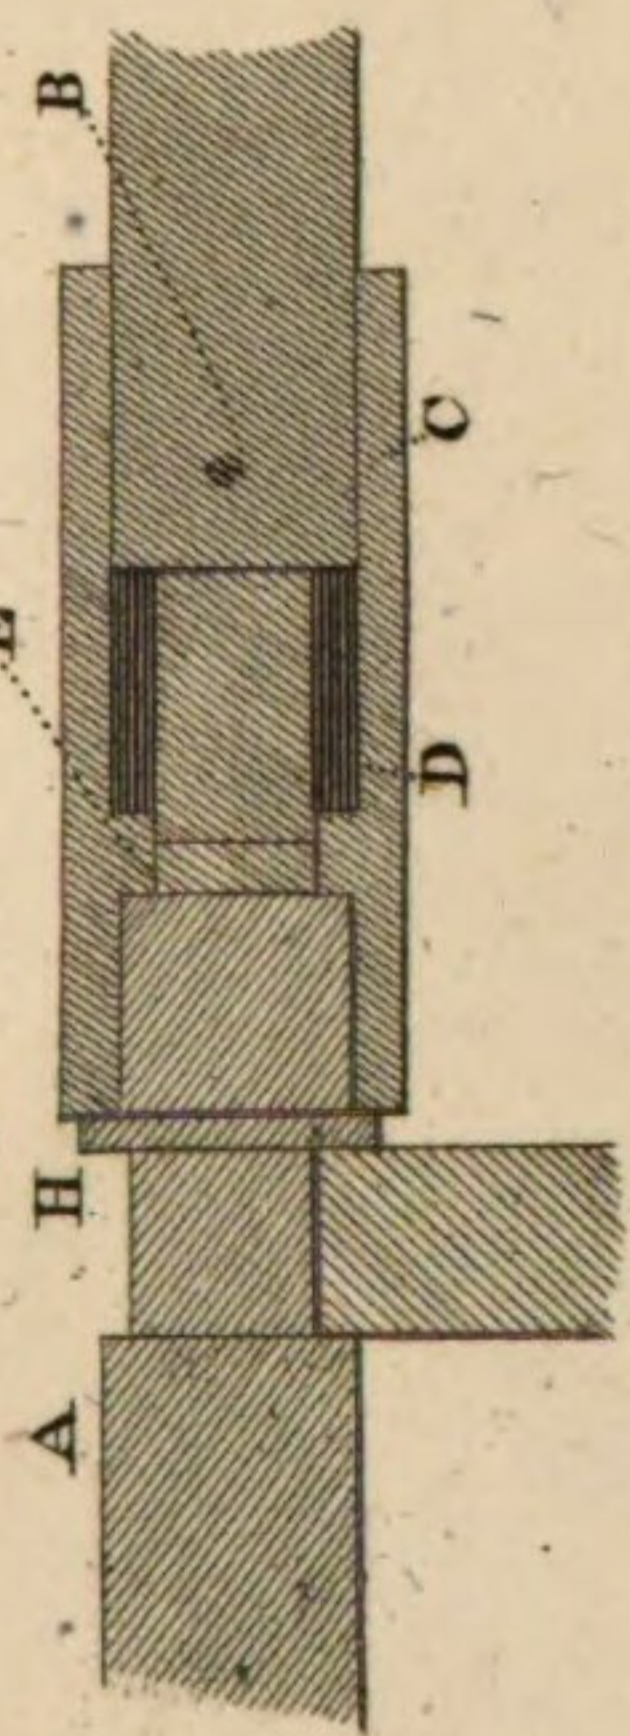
No. 1, and No. 2.—Square coupling for upright shafts, having a socket instead of a box, art. 256, p. 437.
